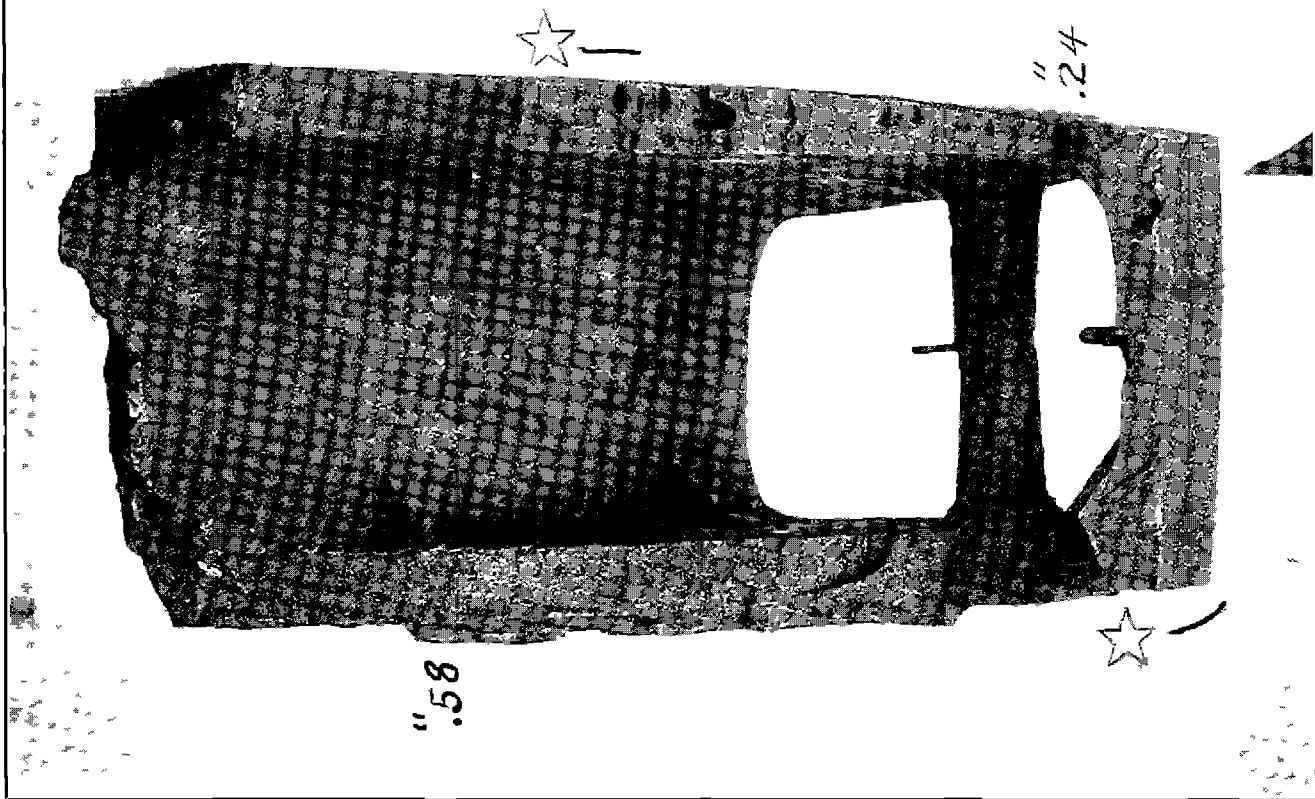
Photograph of fractured surface of Vulcan truck frame end which fractured under gondola car. Preexisting fracture section between stars. Balance of fracture made at time of derailment.
